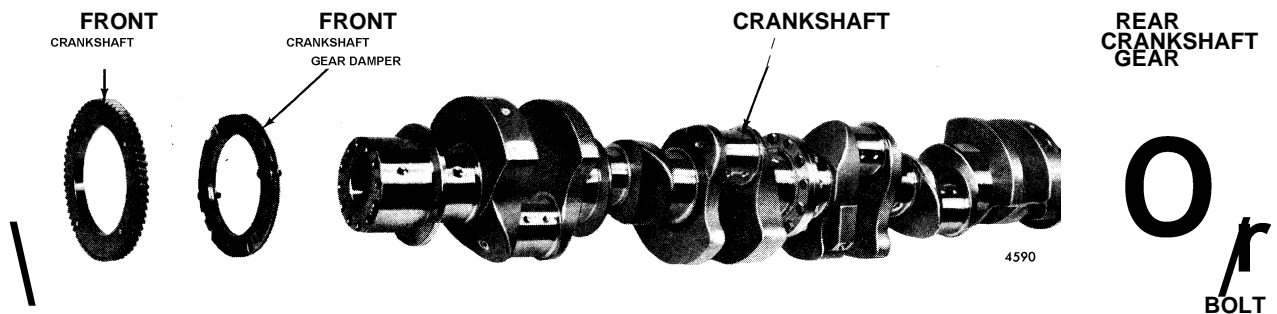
Crankshaft Details and Relative Location of Parts (12V-149)
